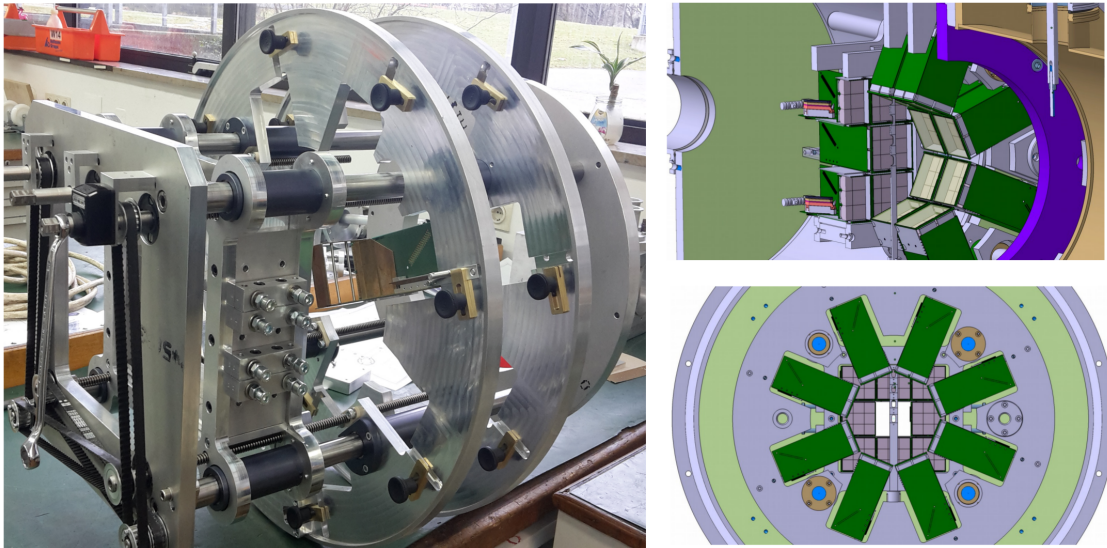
New design of the LYCCA chamber. Left: Prototype of the octagon holder; Right (top): technical drawing (side view), bottom: front view.
